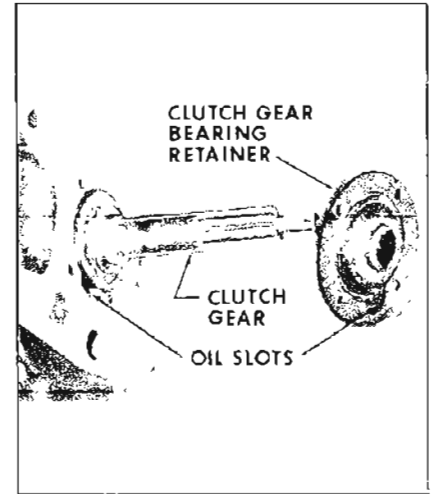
Clutch Gear Bearing Retainer Oil Slot
